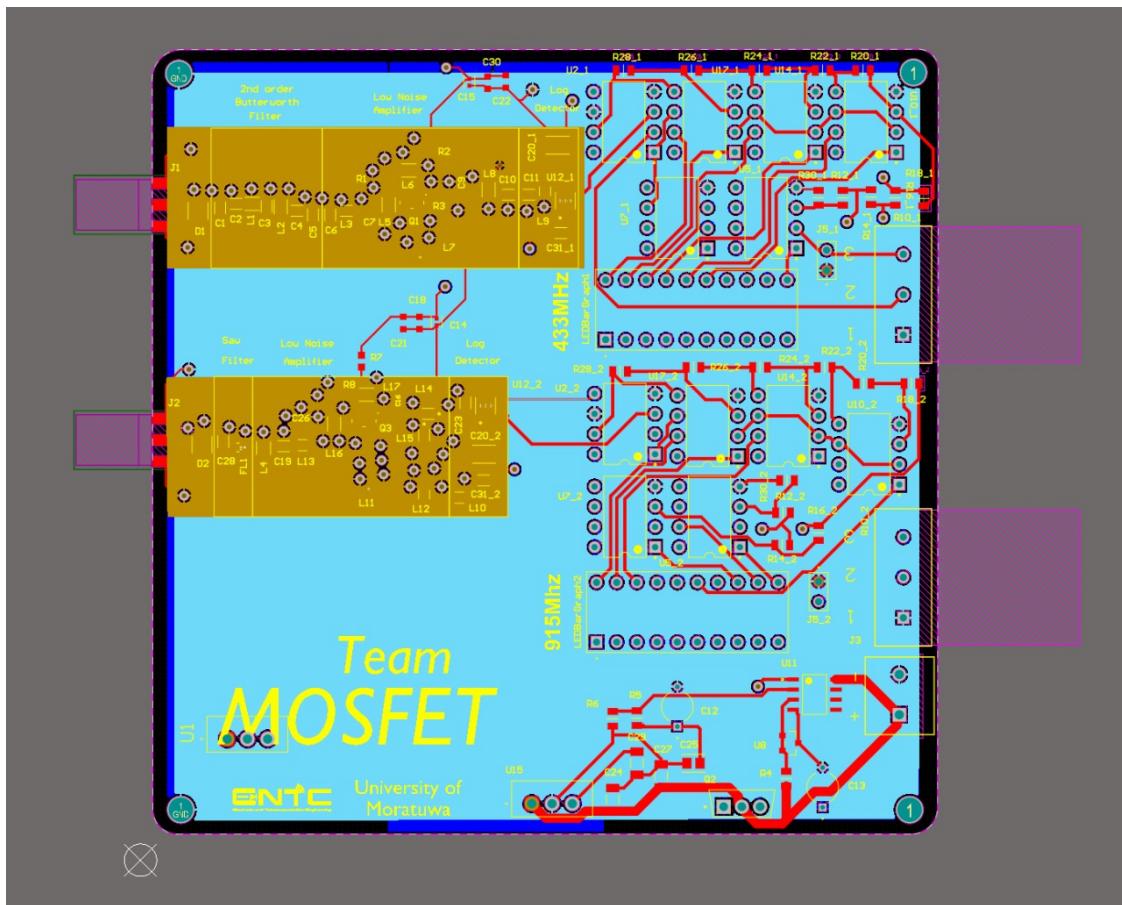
PCB Drawing - RF GND Layer (Layer 2)
